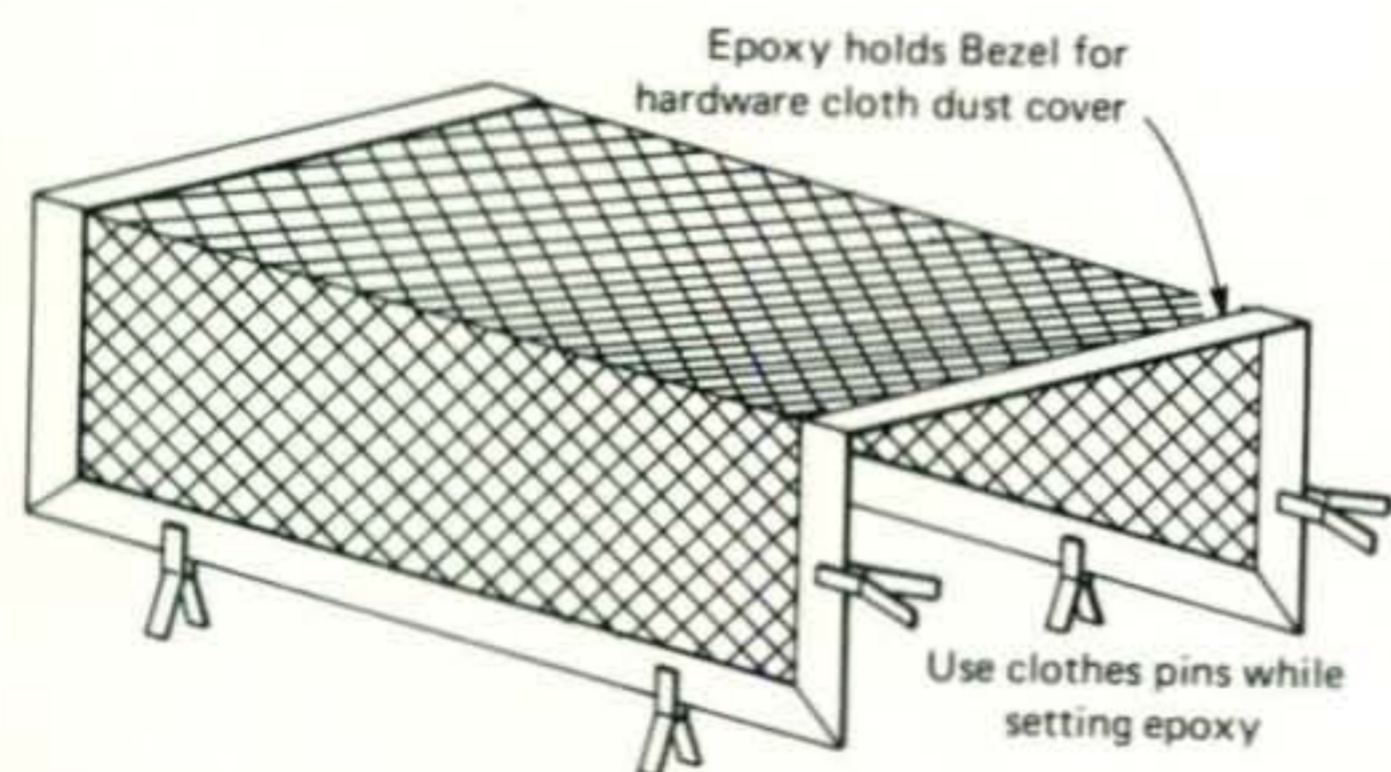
Constructing dust cover for electronic equipment is easy using screening, aluminum strips and epoxy.
